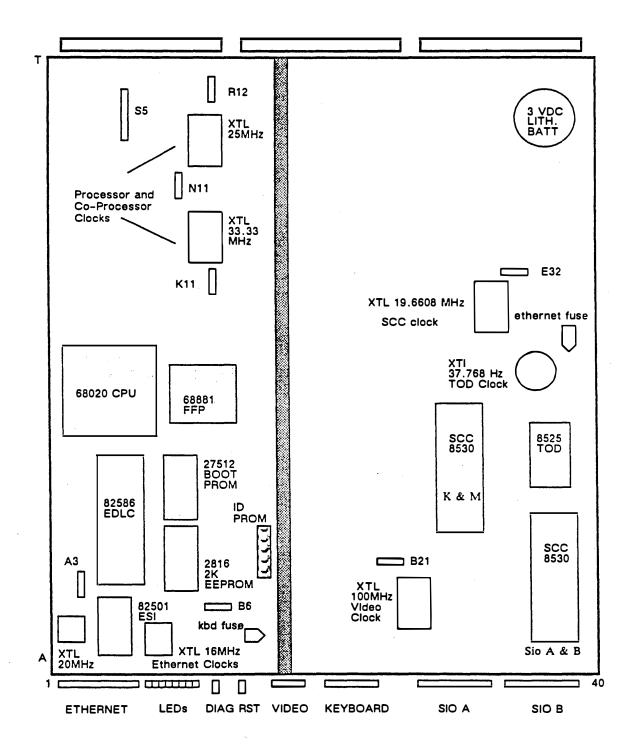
CPU CARD IC LAYOUT AND JUMPER LOCATIONS
